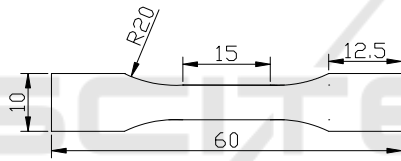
Dimensions of magnesium alloy sample for tensile test (mm).
